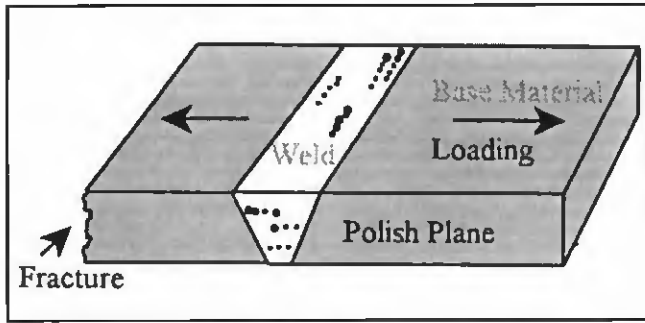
Joint K showing the fracture location in the casting outside the heat-affected zone and the small pores found in the weld.
